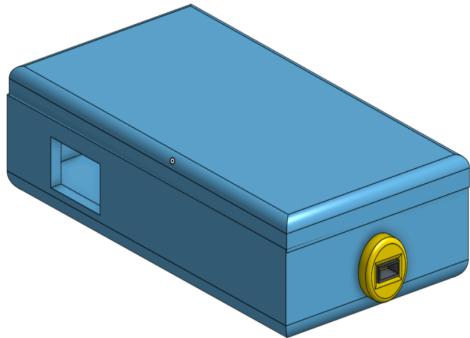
3D Enclosure Design of the Sensor Module
